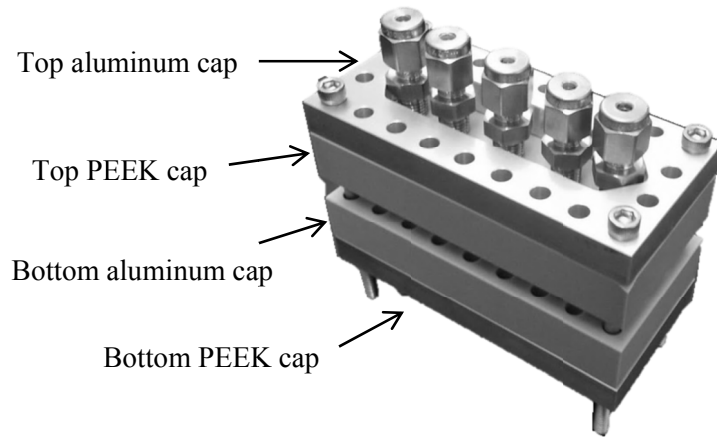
Assembly view of the test section without diffusion bonding to be bolted together
